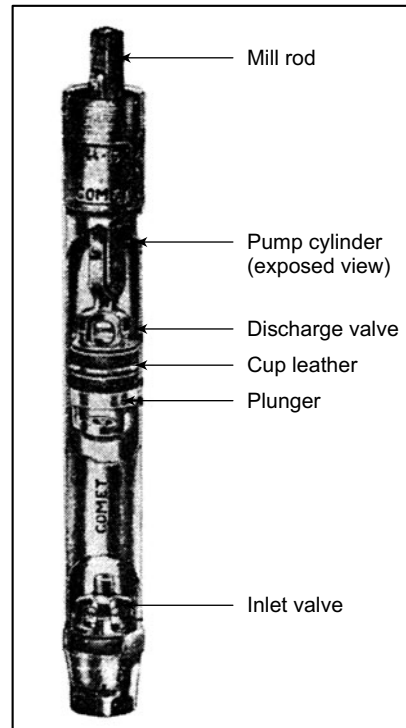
Plunger pump commonly used with windmills. Cut-away view of a section of pump cylinder shows the plunger and valves
